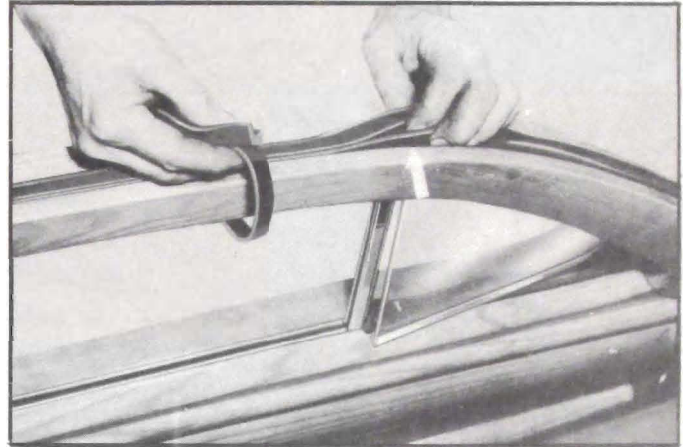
Placing Rubber Strip Behind Door Weatherstrip
